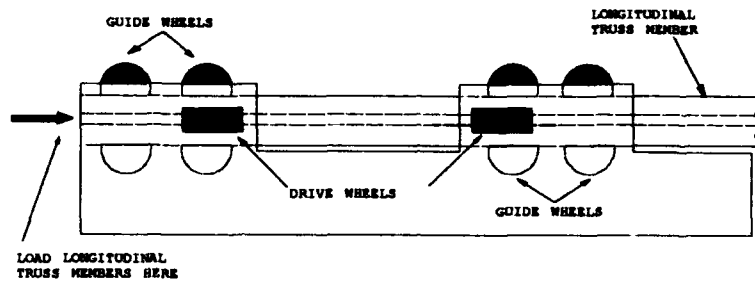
Top view of drive wheels housed in the SFP truss maker drive section. Drive wheels provide the necessary force to push the truss through the truss fabrication process while guide wheels provide support and guidance.
